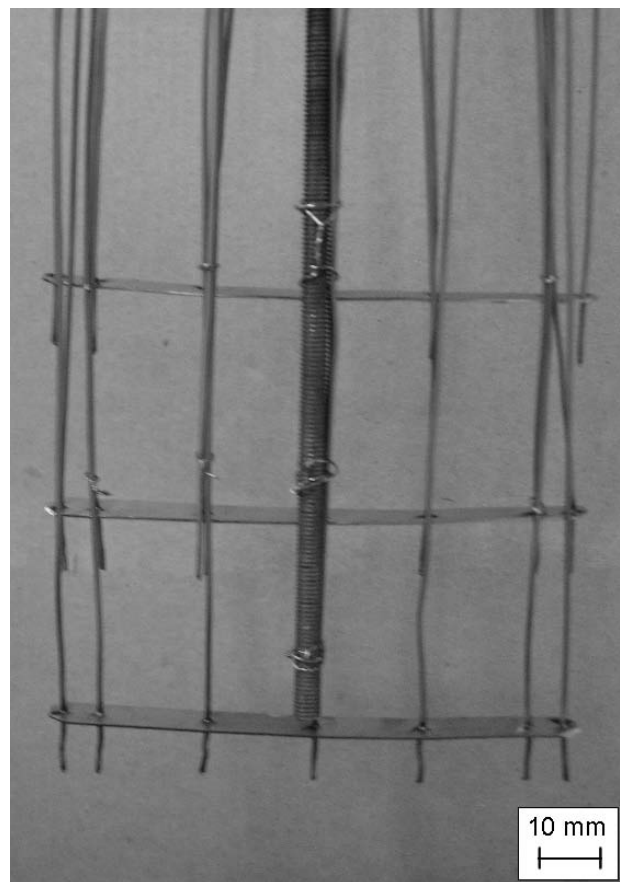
The thermocouple assembly and the welding jig.
